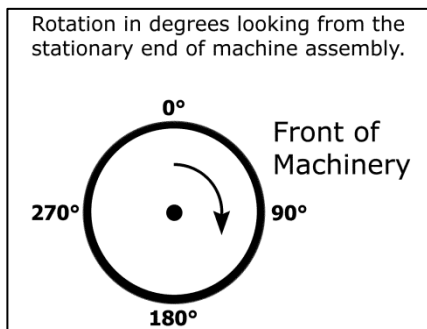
Proper rotation of alignment tool on equipment. Rotation of the shaft-coupling assembly is towards you with the stationary machine to your left and the moveable machine to your right.
